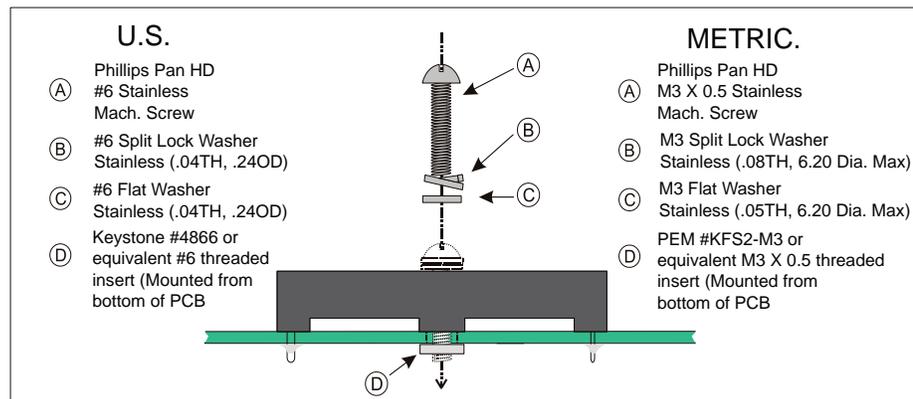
PCB Mounting Hardware (Direct Mounting or Socketed)
